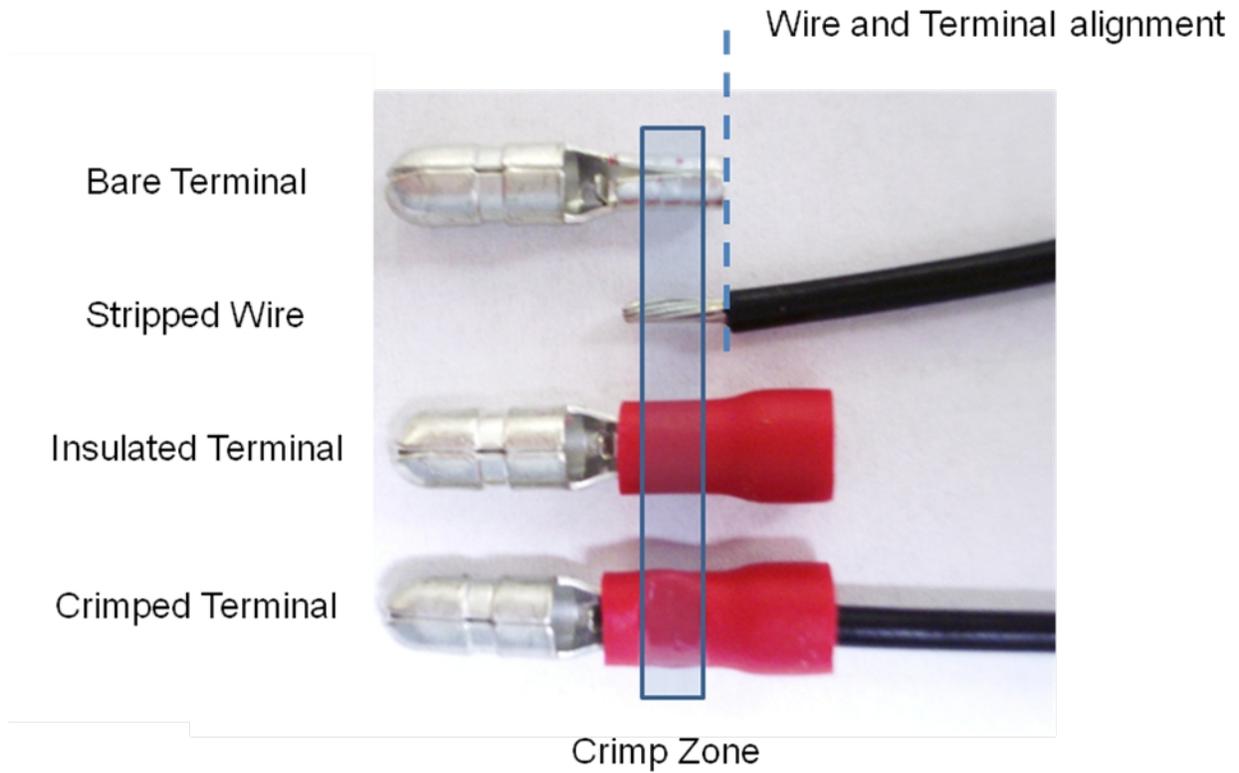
Crimped Terminal showing wire alignment and crimp zone
